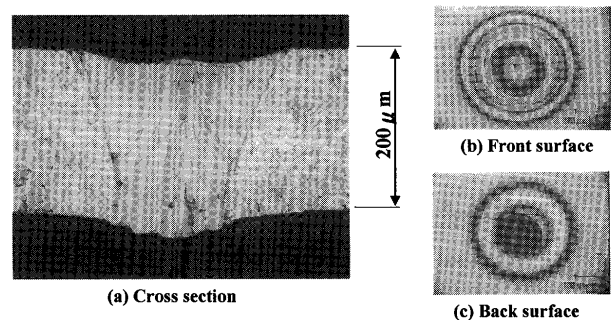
Cross-sectional and surface photos of lasers micro-spot weld in pure copper sheet.
